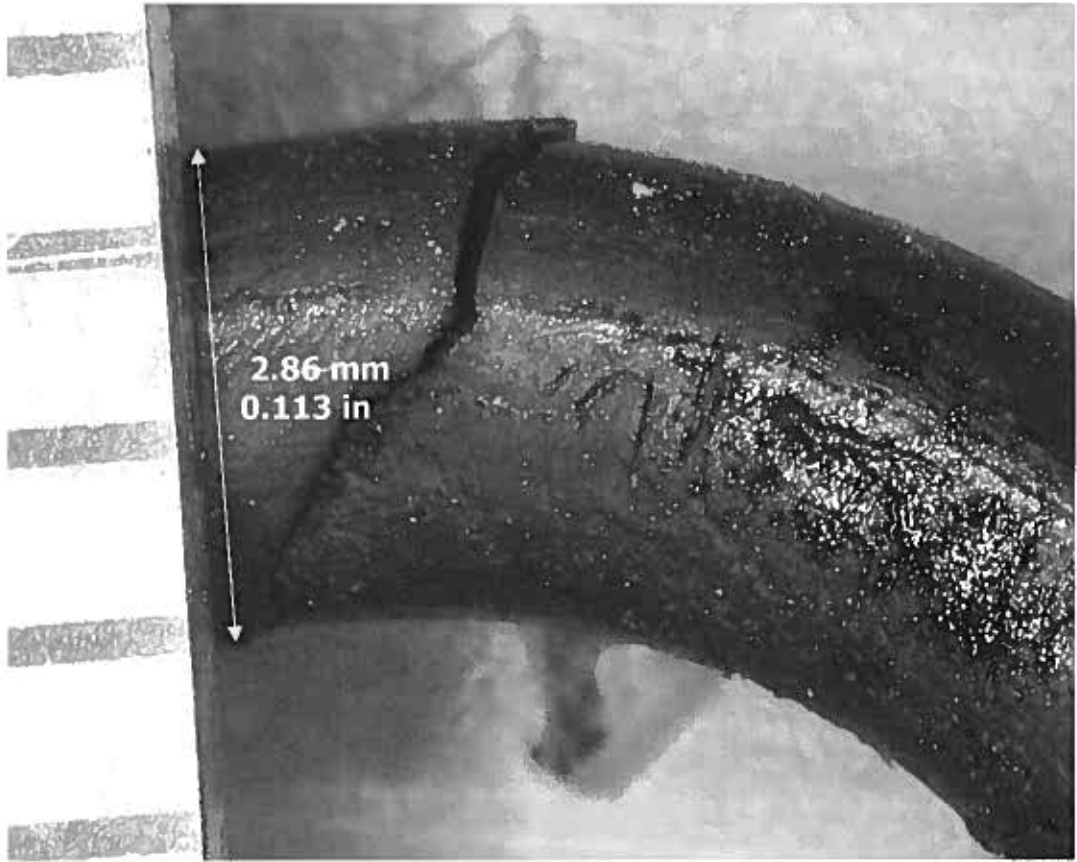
Reassembled O-ring. Estimation of O-ring thickness.
